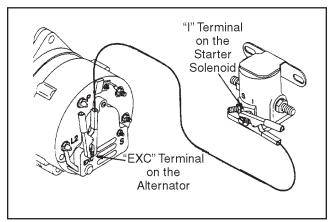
D-5. Jumper Wire to Alternator and Solenoid
